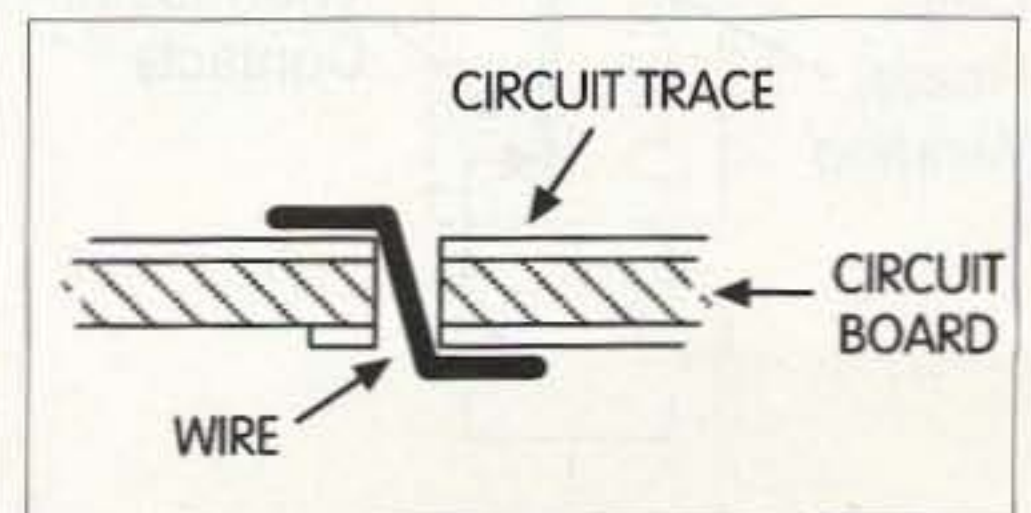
Details of using a Z-wire to connect together the top and bottom side circuit traces of the board.
